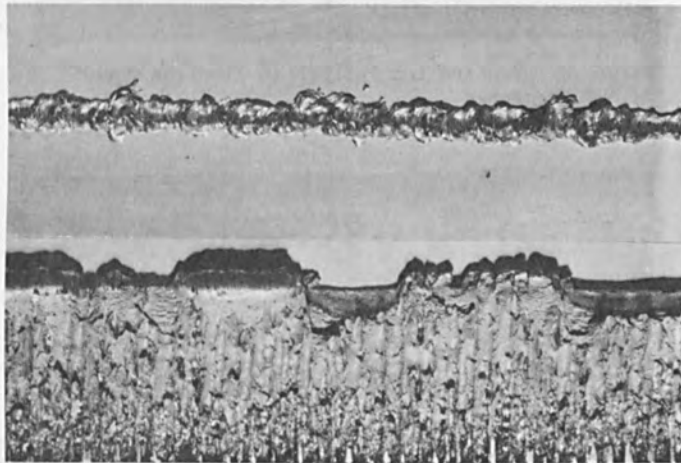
Surface and Fracture Appearance of Weld Made in Aluminum Alloy Type 5083.
